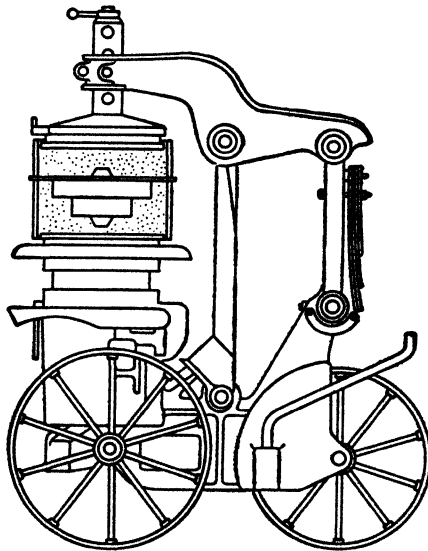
C. Mold in squeezing position. (Reproduced from print belonging to Osborn Manufacturing Co., Cleveland, Ohio.)
